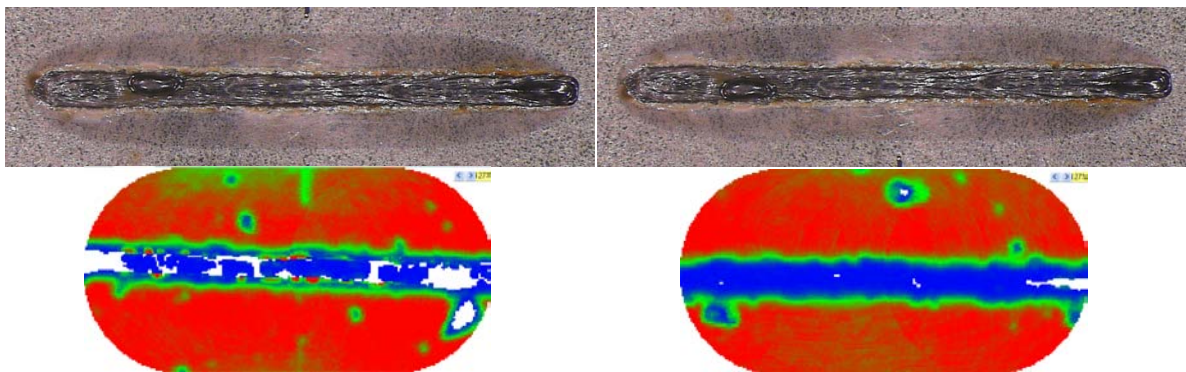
Weld top bead (nubbed, sample A) and Amstech result from top bead (L) and bottom bead (R)
